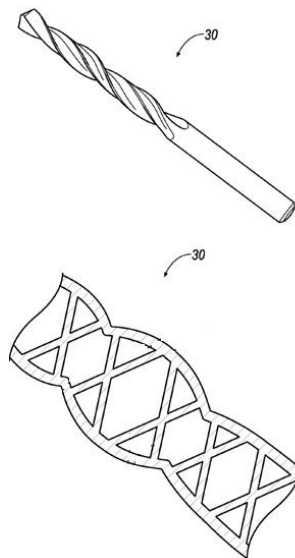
3D printed cutting tool with optimized design enabling weight reduction (Mod. Stoyanov 2016).
